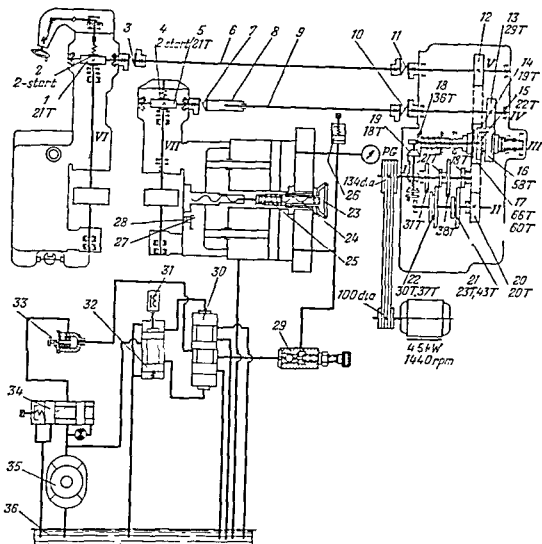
Combined hydraulic circuit and gearing diagram of the thread-rolling machine, model 5A933
